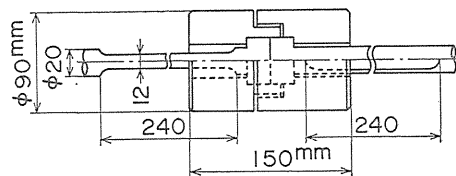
7. Assembled driven shaft S_h and rotor D.
